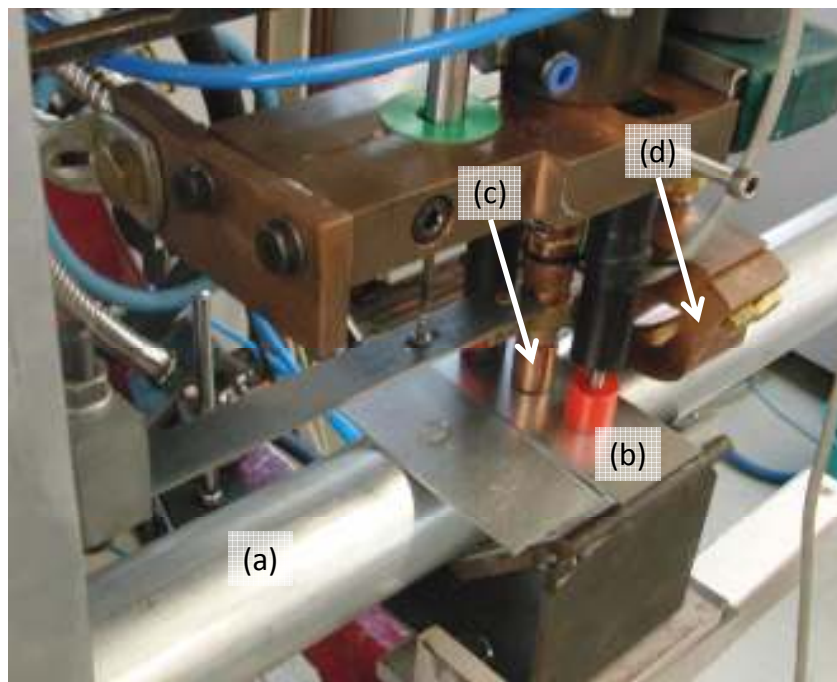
Experimental setup in laboratory of Dortmund FuE-A Pressfügen/Kleben, ThyssenKrupp for single-sided spot welding of sheet to tube consisting of (a) tube, (b) sheet, (c) primary electrode and (d) secondary electrode.
